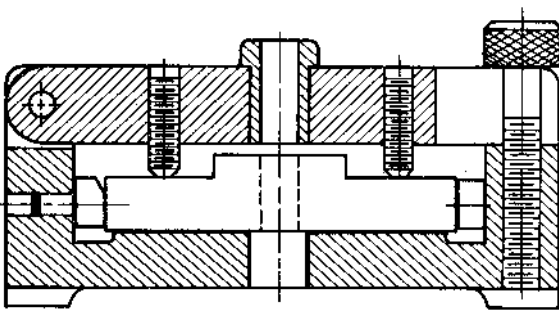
Using the box jig for drilling holes in an engine link.
